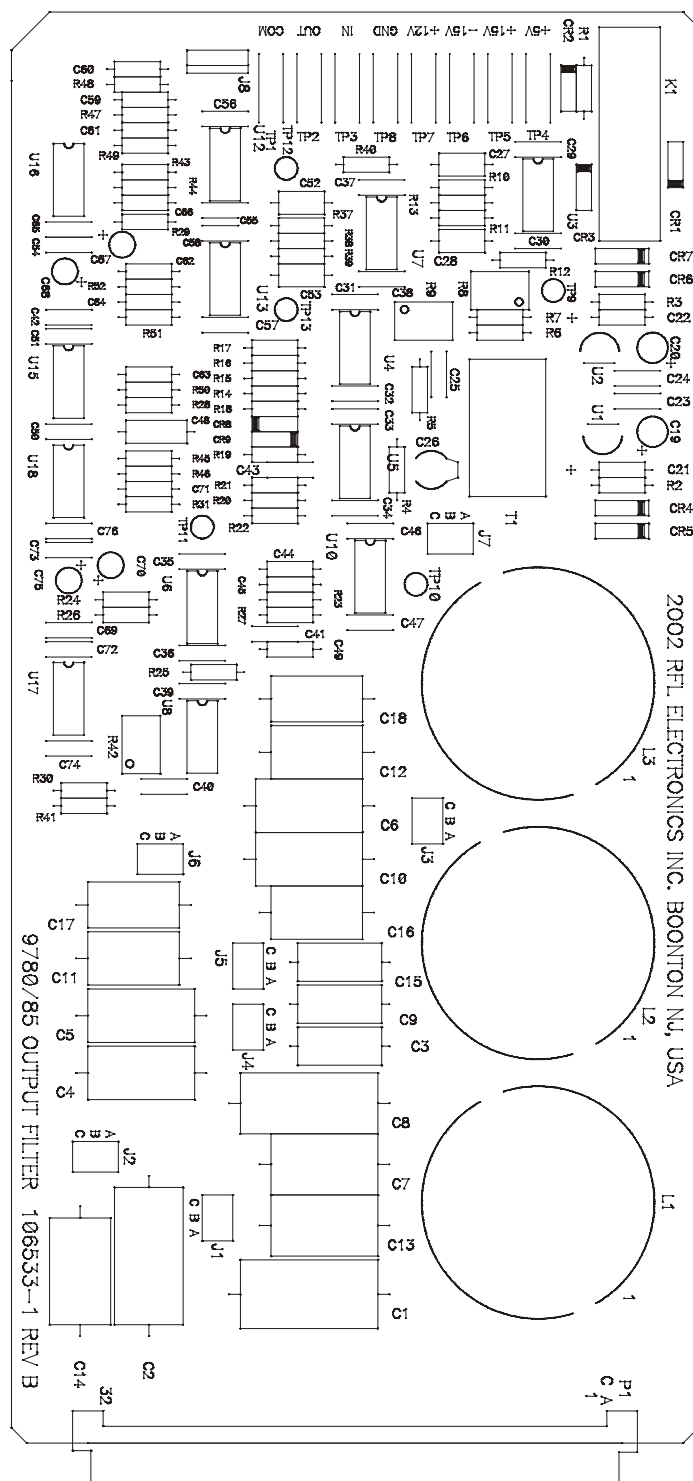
Component Locator Drawing, RFL 9785 Output Filter Module (Assy No. 106530-11 to -15)
